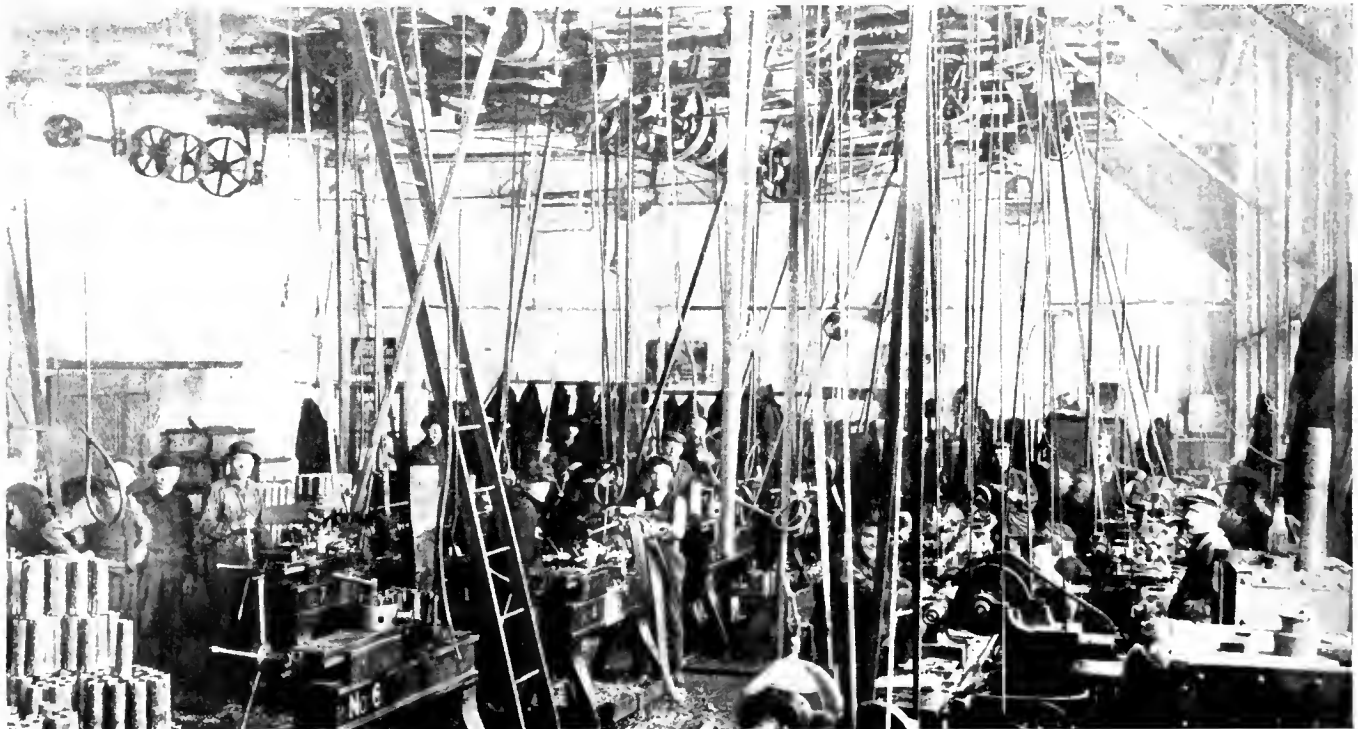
GENERAL VIEW OF CARTRIDGE CASE MACHINING DEPARTMENT.
